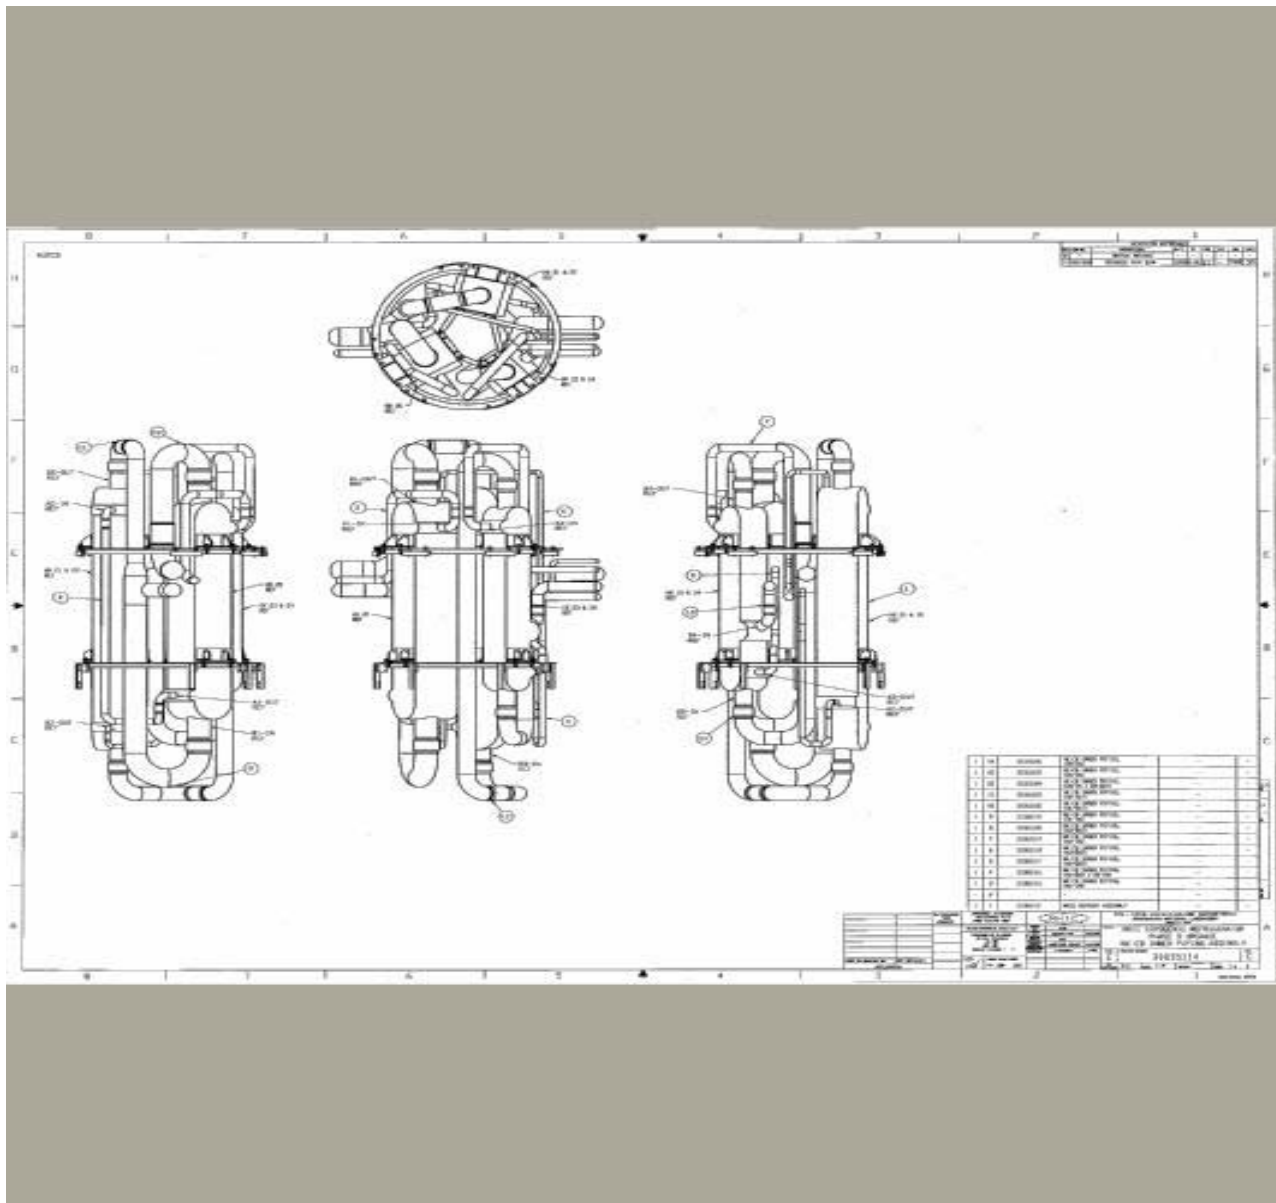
Figure C: - Cold Box 6 with the vacuum tank removed, drawing No.3105114-5-1.
